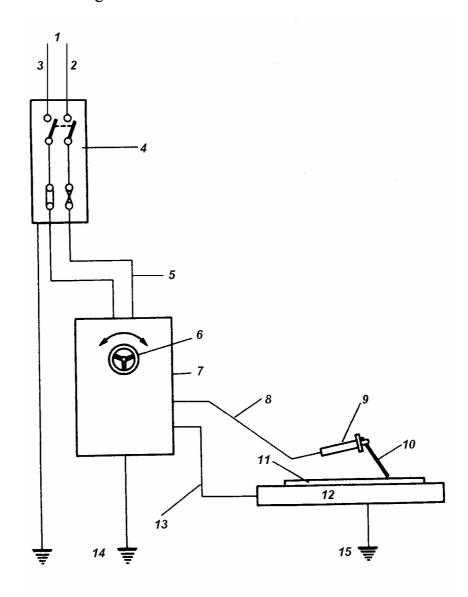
Manual metal-arc welding circuit diagram:
